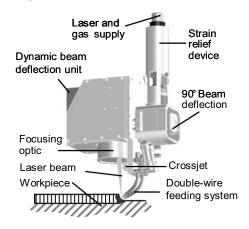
Concept of a hybrid processing unit for laser deposition welding, laser hardening and laser ablation.
